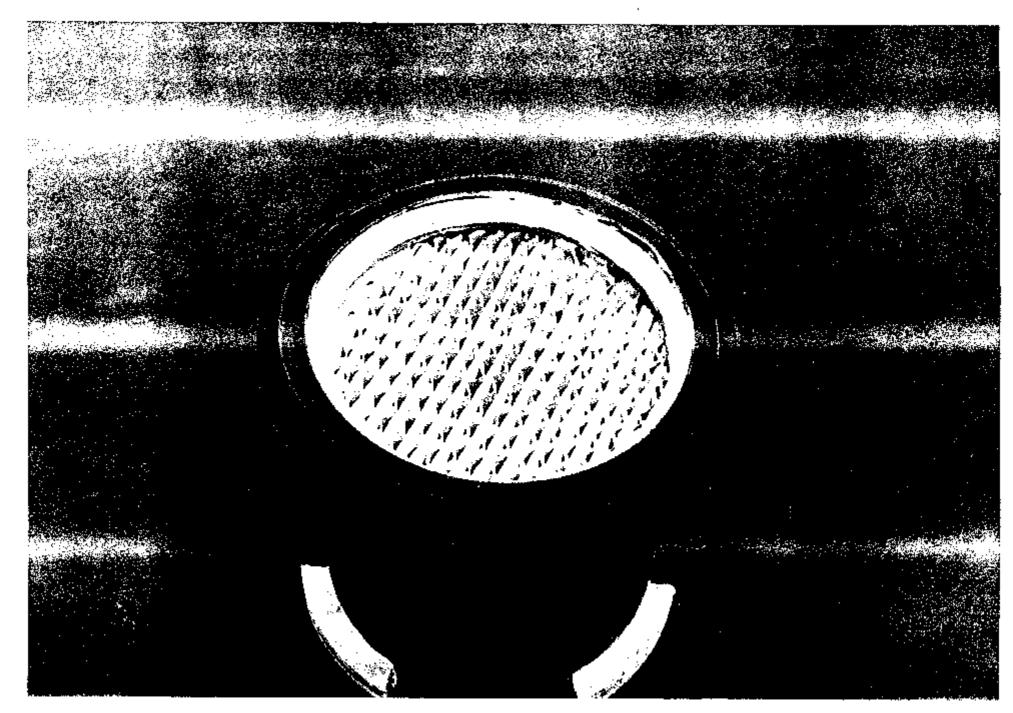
Assembly of Filter, Rubber Gasket and Spacers
